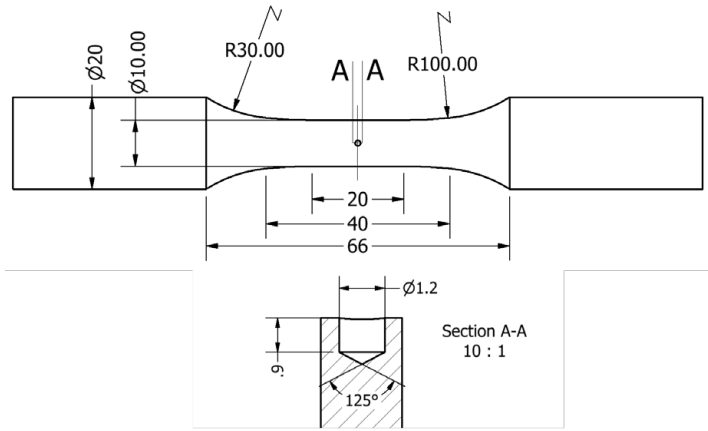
Dimensions and geometry of the notched test bars used in Paper A. Dimensions in mm.
